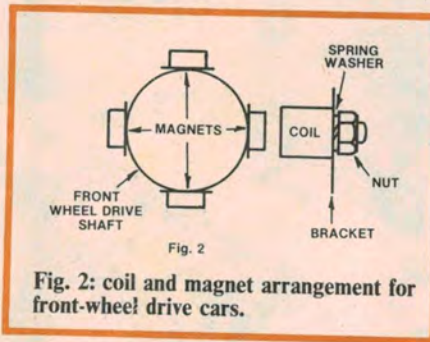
coil and magnet arrangement for front-wheel drive cars.
